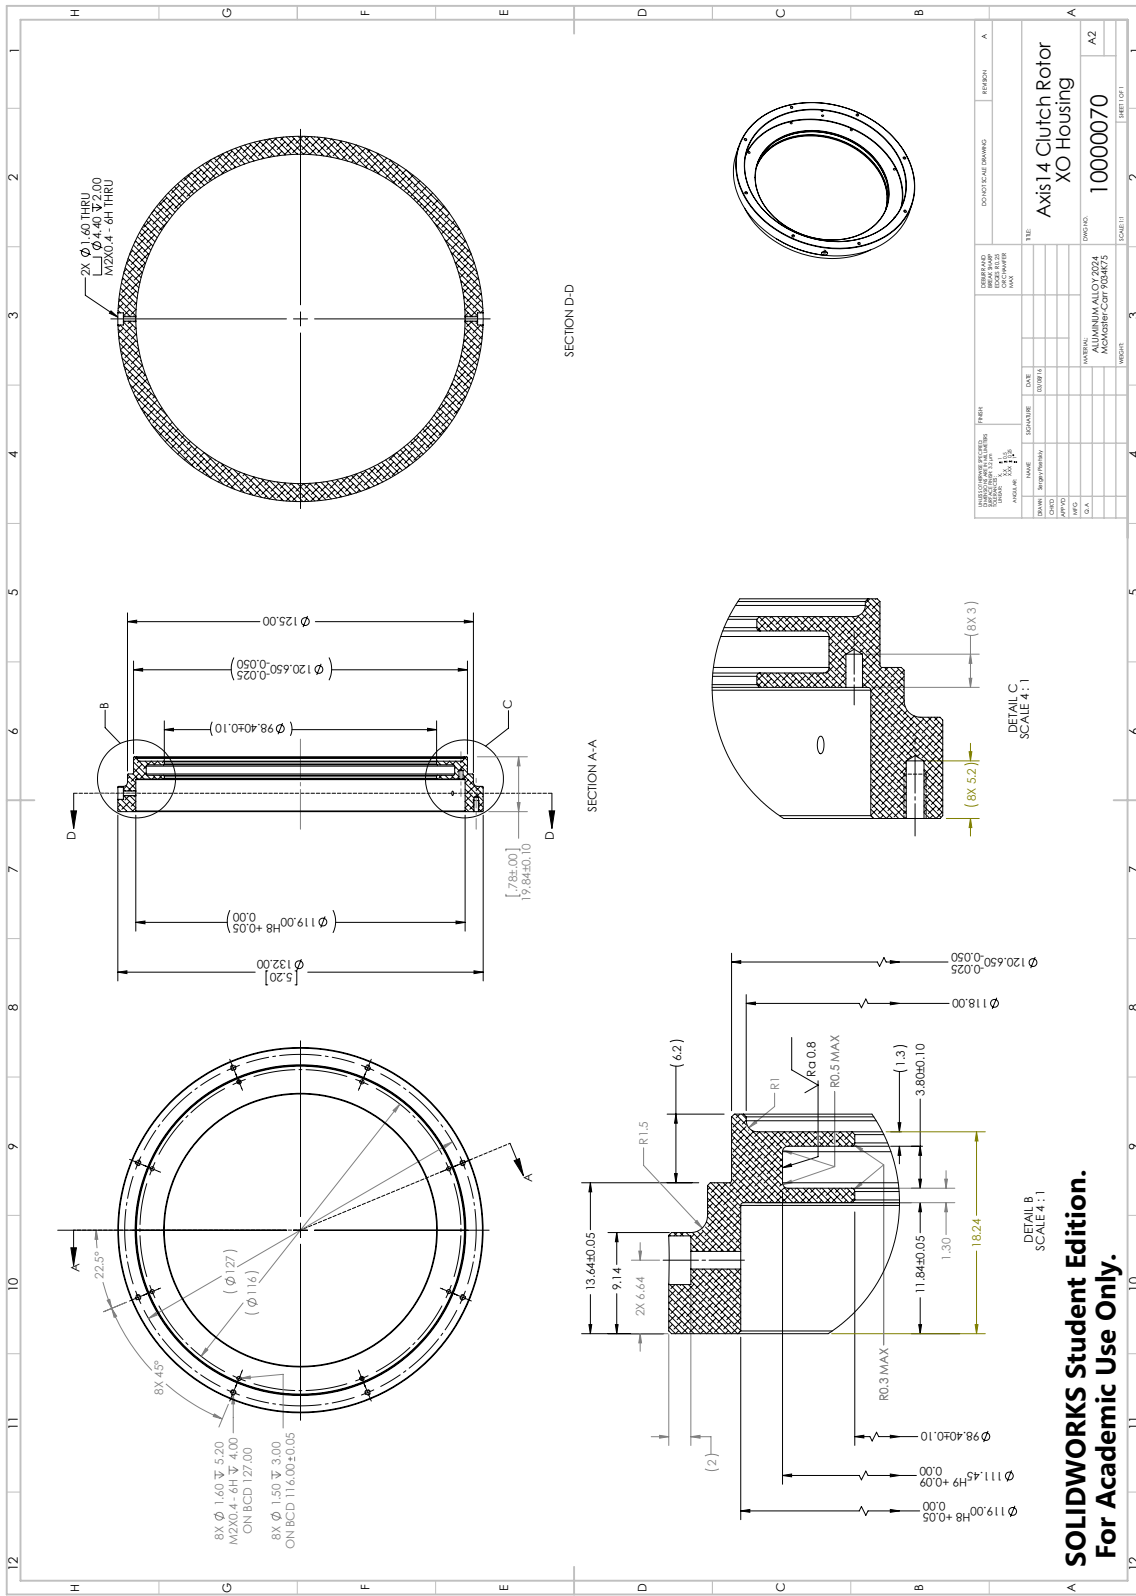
Drawing: Joint 1, 4 clutch rotor housing.
